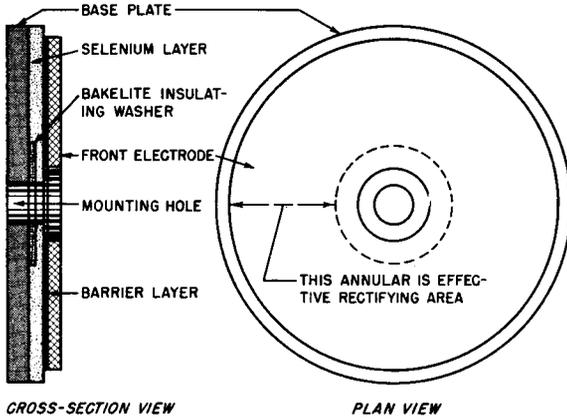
Cross-Sectional and Plan View of Selenium Rectifier Cell Using Insulating Washer Principle.
